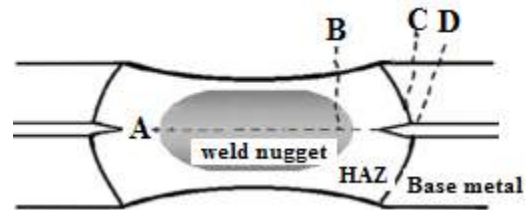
Schematic of a spot weld cross section with typical tensile shear failure modes
